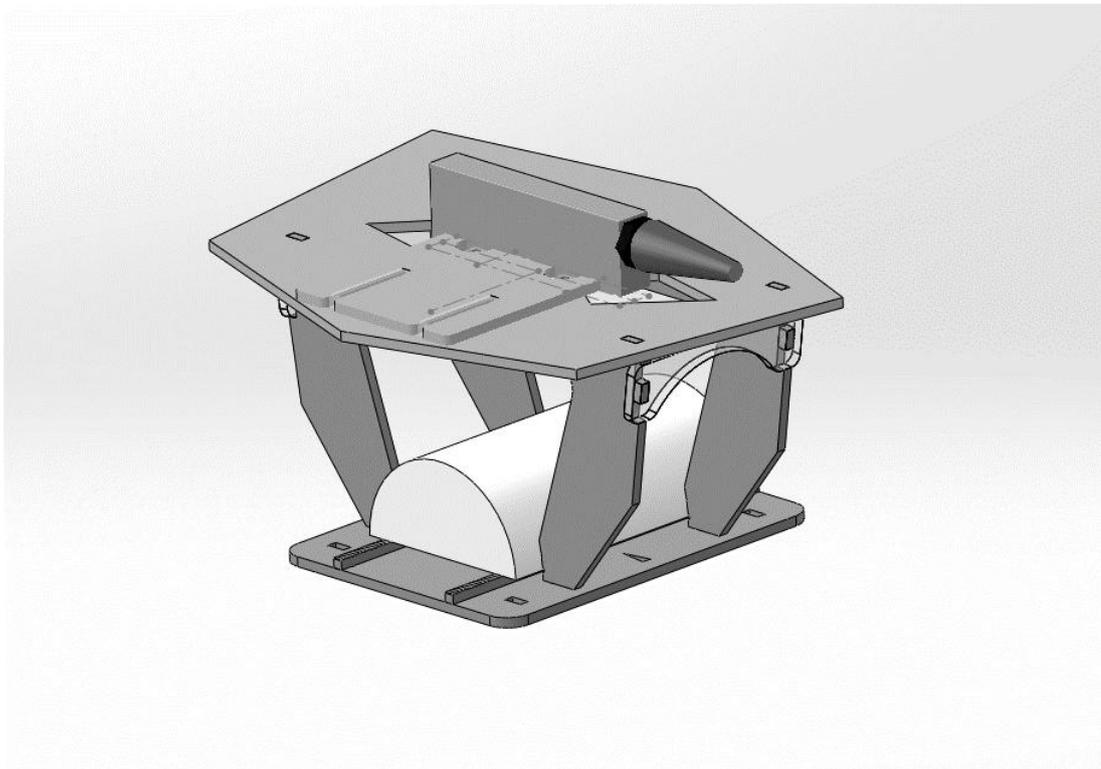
The experimental specimen and probe holder. Irregular geometry of the top plate has been used to avoid spurious reflections.
